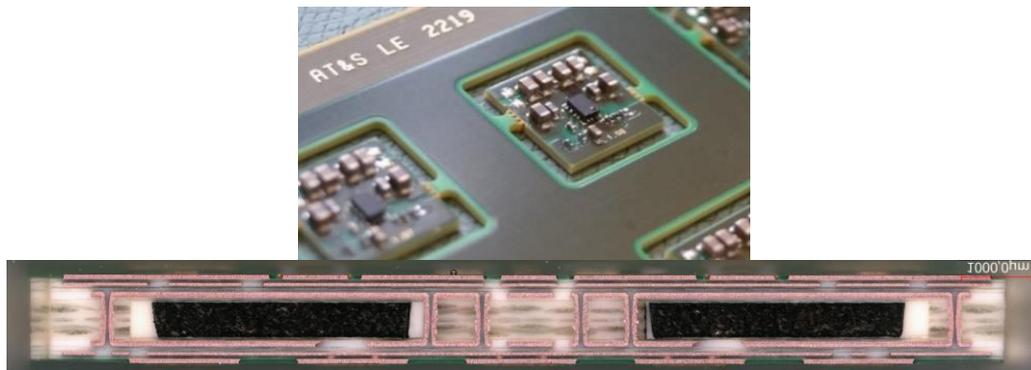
Assembled DC-DC converter and cross-section of PCB.
